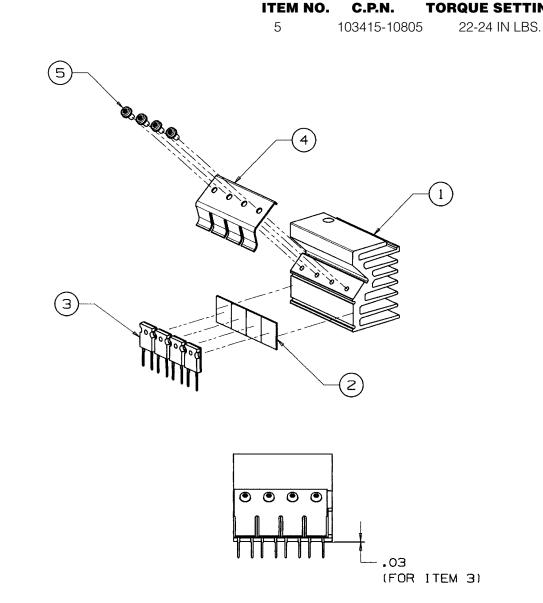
CE4000 PS Diode Heatsink Assembly (Exploded View)
